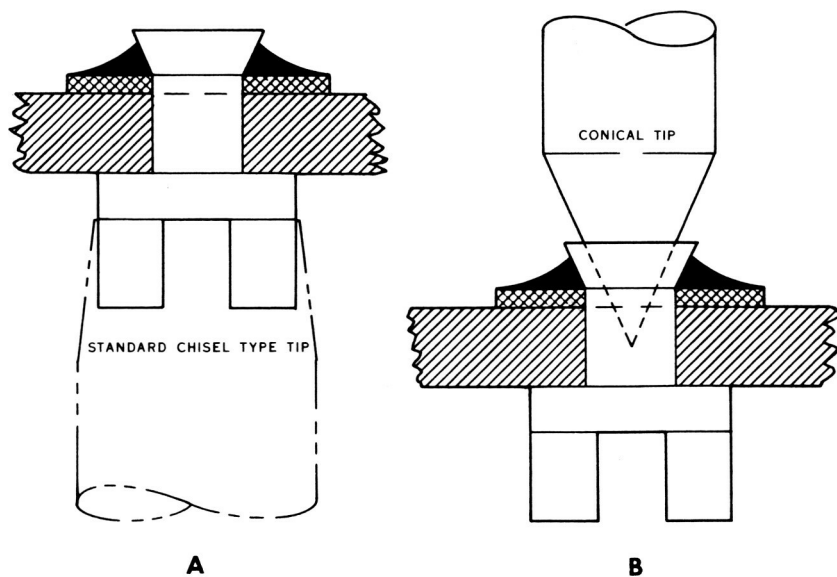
Soldering a swaged terminal. An alternate method is shown on the right.
